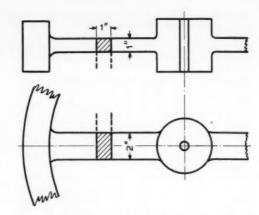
Calculation of surface/vo'um: ratio and selection of the proper iron for 50,000-psi spoke section of this gear blank casting is shown in Example 2.
